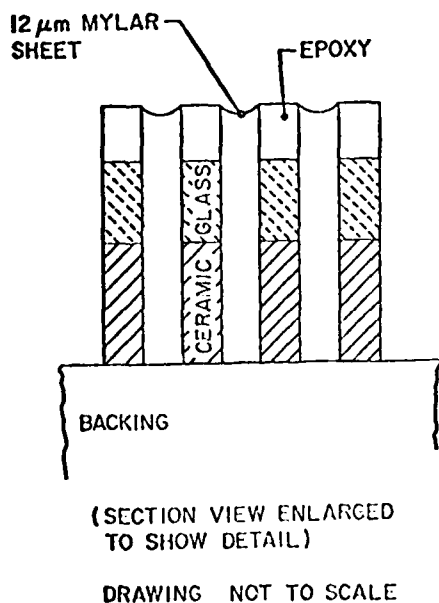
Assembly drawing of longitudinal wave transducer array.
